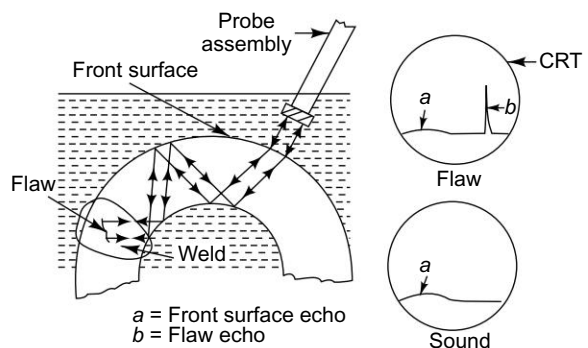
Immersion Testing of Welded Tubes
